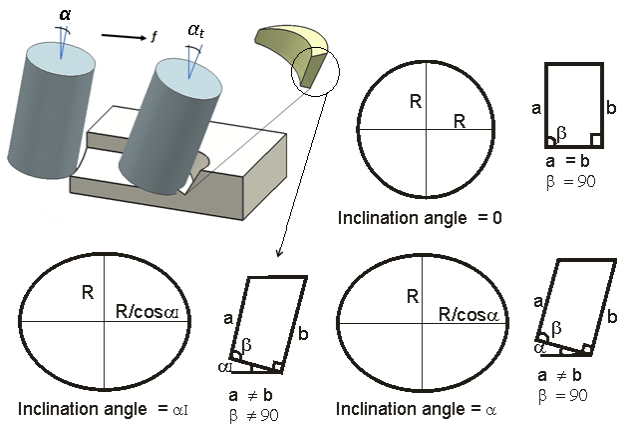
Cutting tool and cross cut of chip shape. a) 3D model of cutting tool and chip; b, c, d) top view of actual cutting tool shape and front view of instantaneous cross cut of chip shape at various inclination angles [12]
